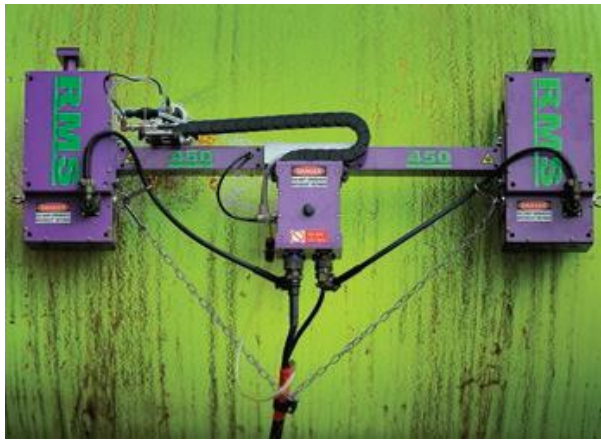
Phoenix ISL Dual-axis motorised weld scanner [50]
